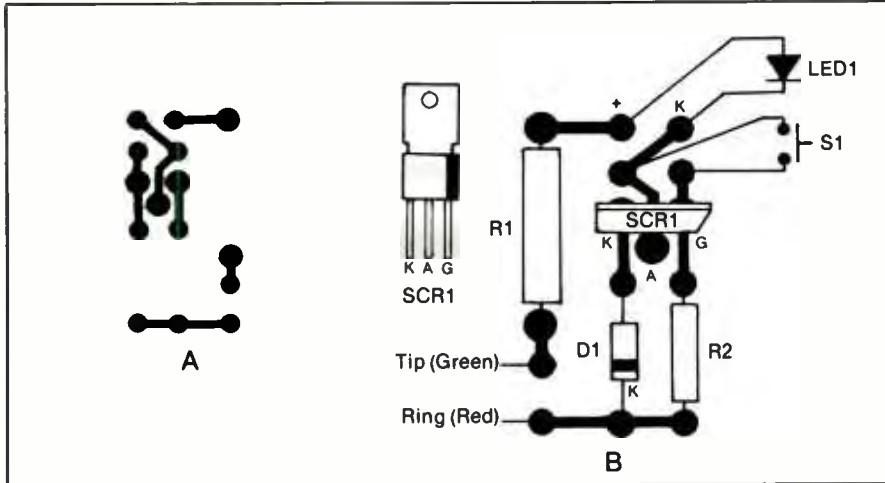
Actual-size etching-and-drilling guide (A) for fabricating a printed-circuit board for the project. No board outline is shown because the dimensions of the board you actually use will depend on available space and mounting conditions inside a particular telephone instrument. Wiring details (B) for on- and off-board components for pc board. Use this as a guide to mounting components and wiring them together if you use perforated board instead of a printed-circuit board.
